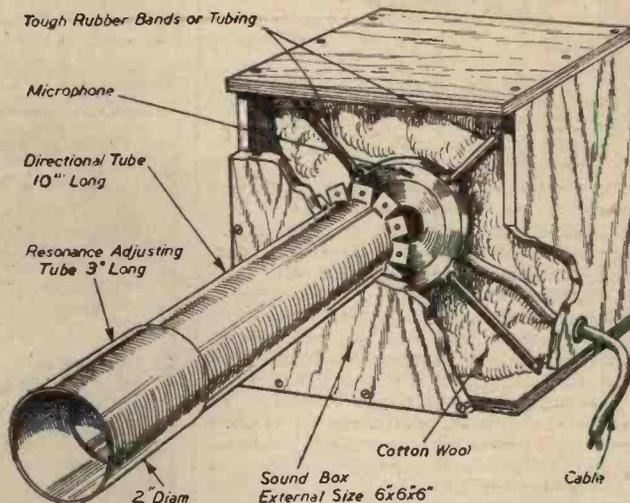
Part sectional view showing construction of sound box and directional resonator tube.
